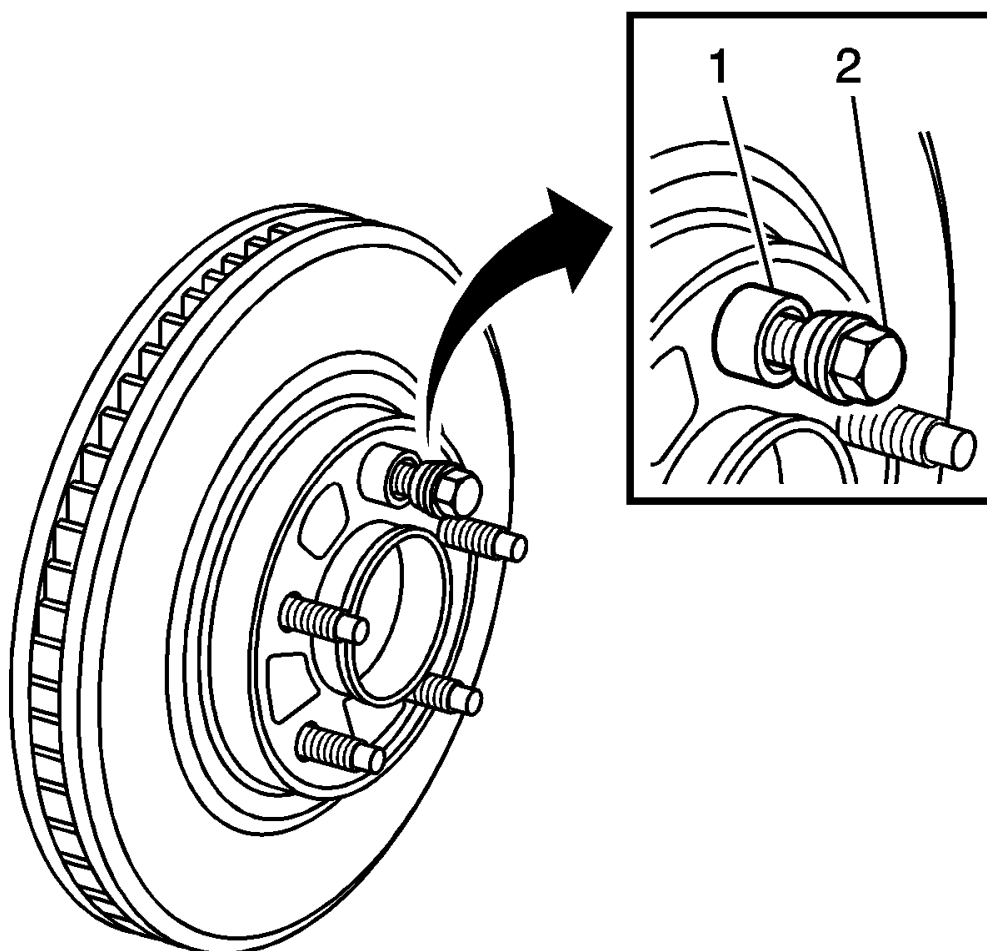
Conical Brake Rotor Washers & Lug Nut
